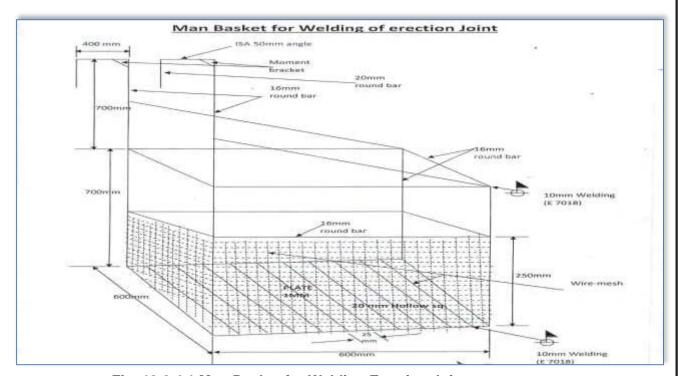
Man Basket for Welding Erection Joint
